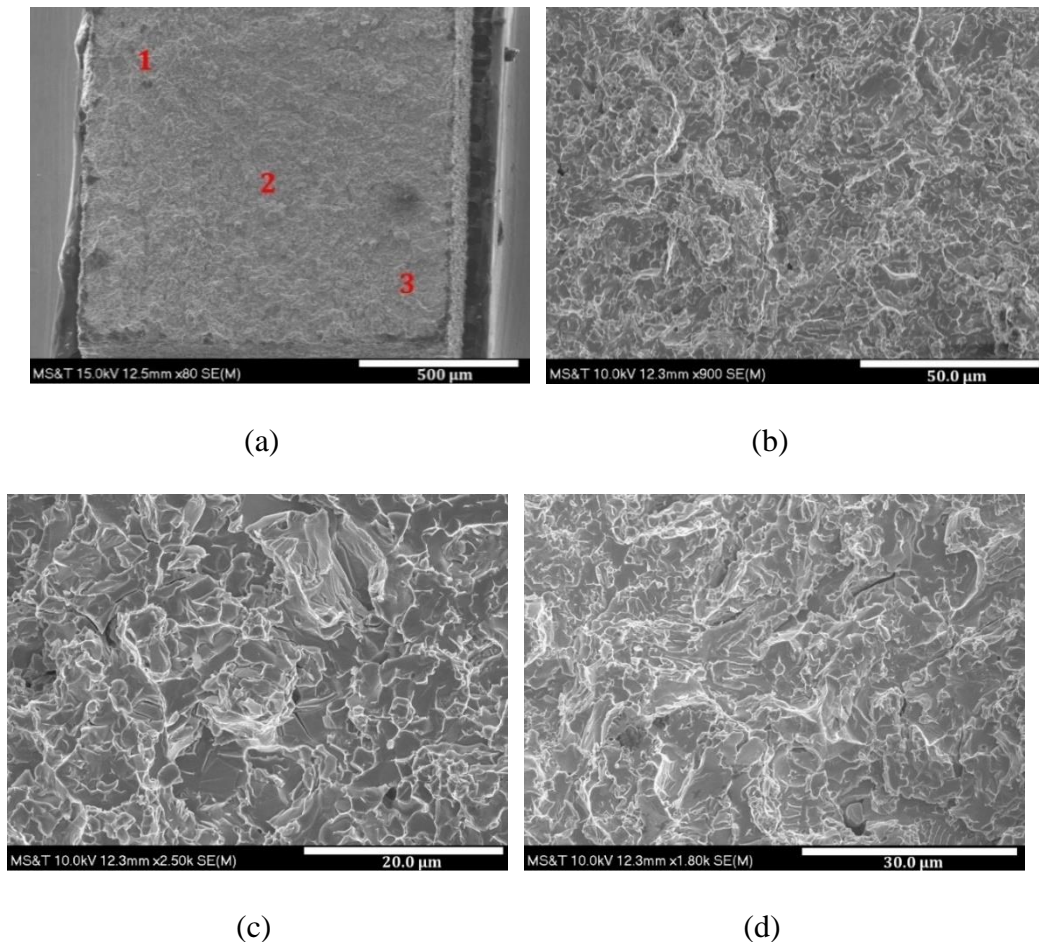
Fracture morphologies in cross-section of a Wallex 40 + H13 tool steel sample. (a) Overview of the fracture surface; (b) Magnified view of position 1; (c) Magnified view of position 2; (d) Magnified view of position 3
